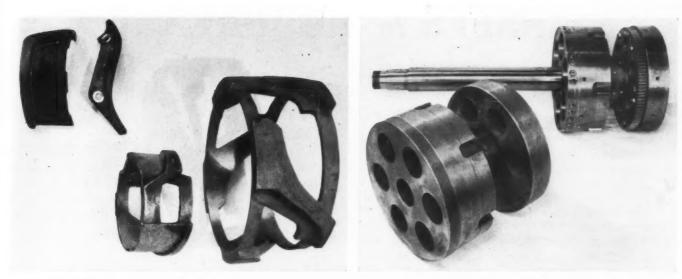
Left—Rearrangement of patterns for cam castings from single cam type at upper left to castings containing two, four or six cams brought machining economies. Fig. 2—Casting for spindle carrier of automatic bar machine, and complete assembly after fabrication. Strength was doubled, strains obviated
